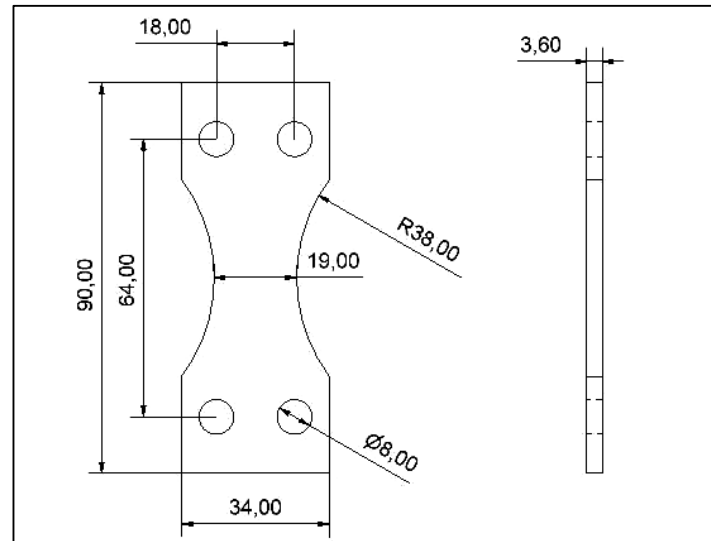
Dimensions of hour glass fatigue specimen (mm)
